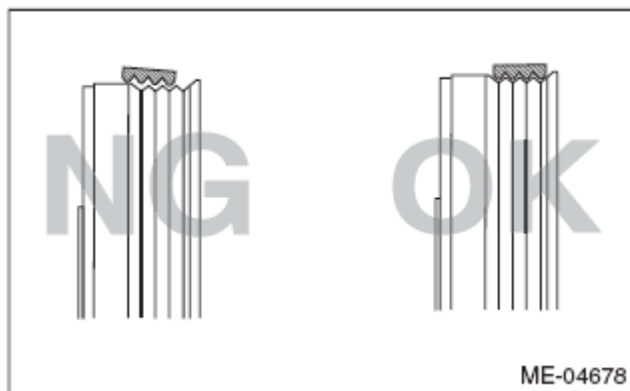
Caution For Placing Rib On A/C Compressor Pulley Groove
